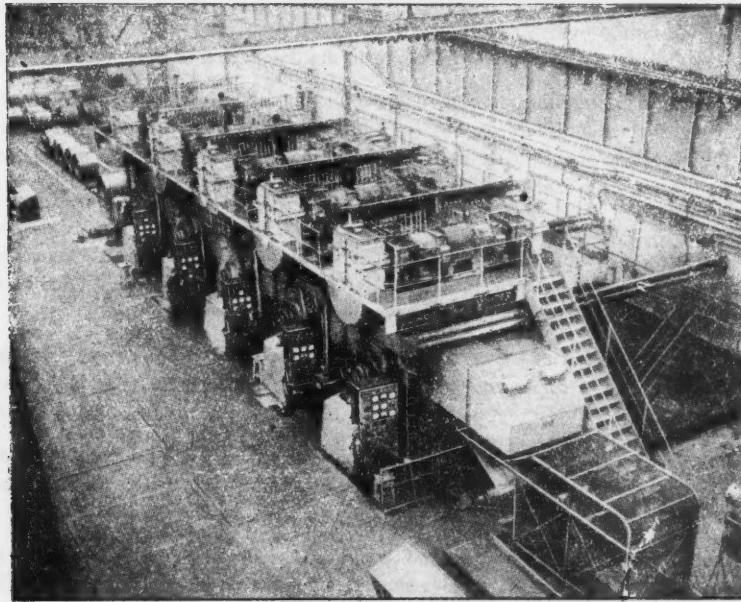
New 1060 mm five-stand mill for cold rolling of steel sheet at the Richard Thomas and Baldwin Works.
